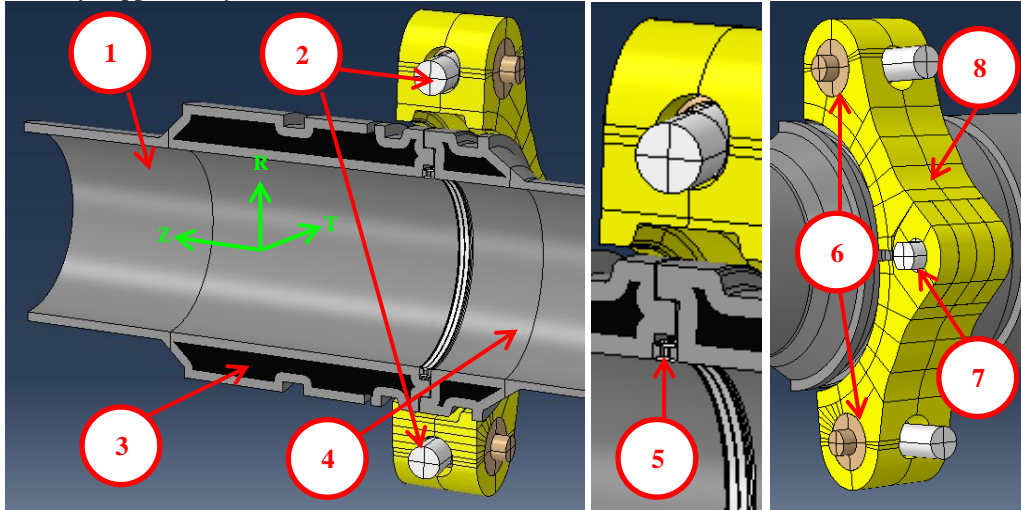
Left to right: schematic symmetry plan view of the No.36 Optima and cylindrical co-ordinate system, close-up of hub, seal and clamp geometry detail, external view of clamp segments.
